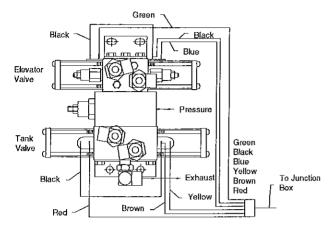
VALVE ELECTRICAL CONNECTION
